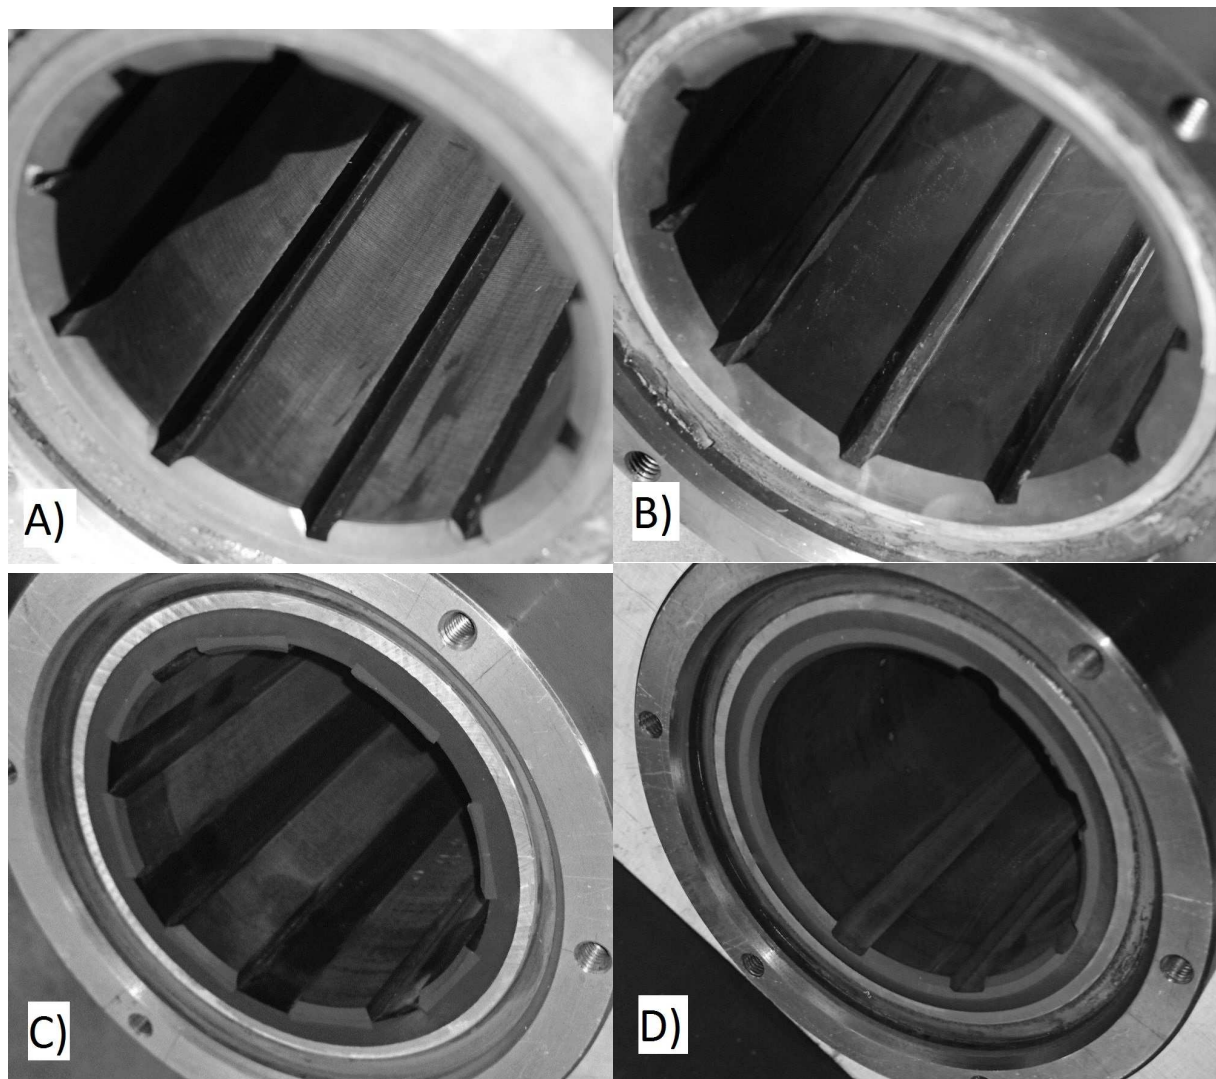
Photographs of tested bushes, A, B – rubber (NBR) bearings, C,D- three-layer bearing PTFE-NBR-bronze
